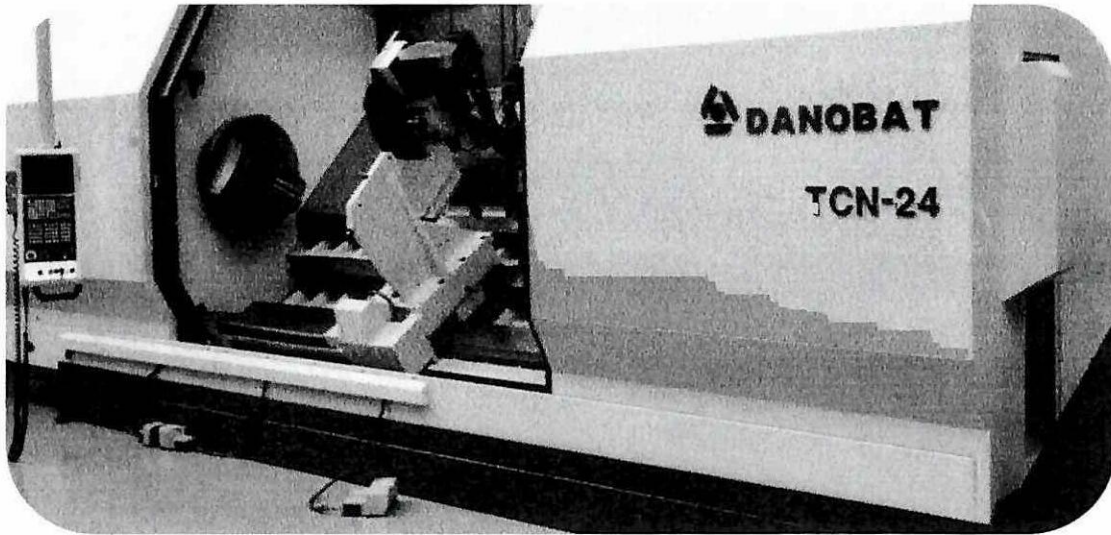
(b) (i): Horizontal CNC Lathe Machine
